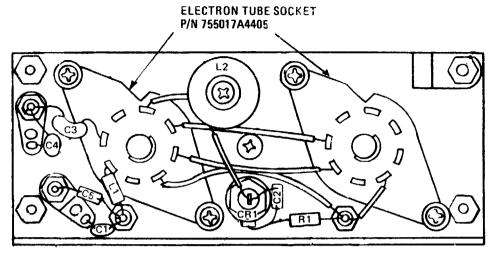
Tube Socket Assembly 1A14A2, PN 755017A4400
